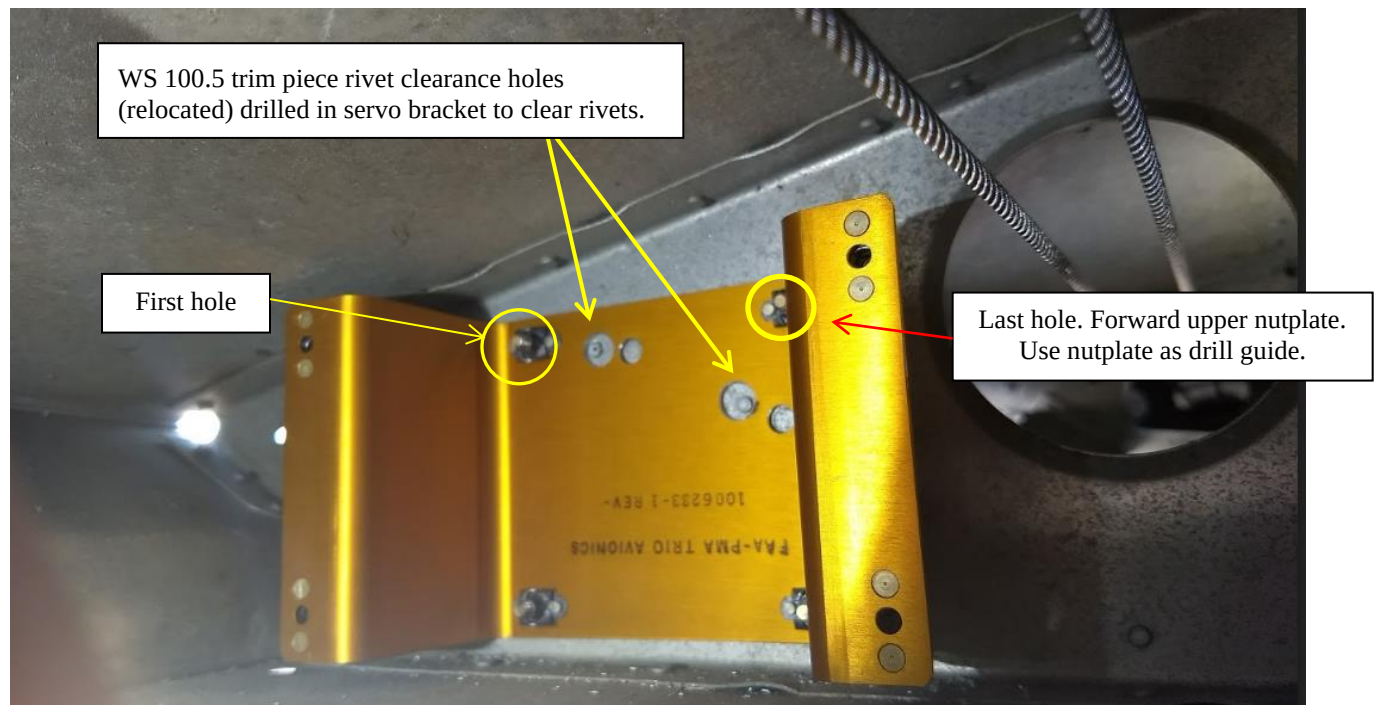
ROLL SERVO BRACKET ASSEMBLY AT W.S. 100.5
